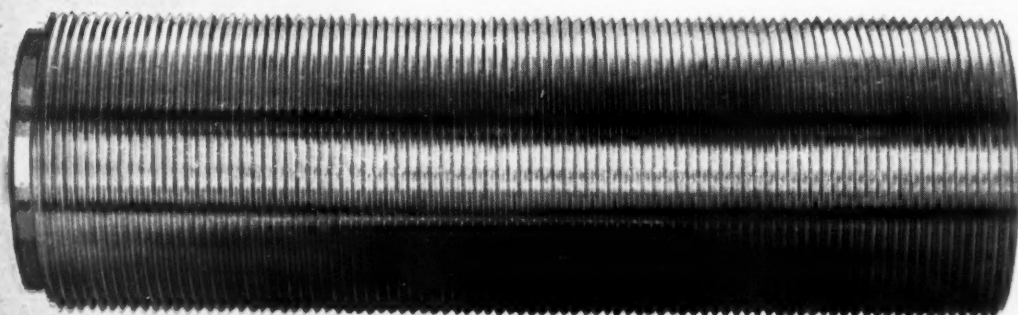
Precision Thread Grinding Provides a Means of Accurately Correcting Distortion Errors due to Heat-treatment. Threads can also be Produced Entirely by Grinding Hardened Solid Blanks
